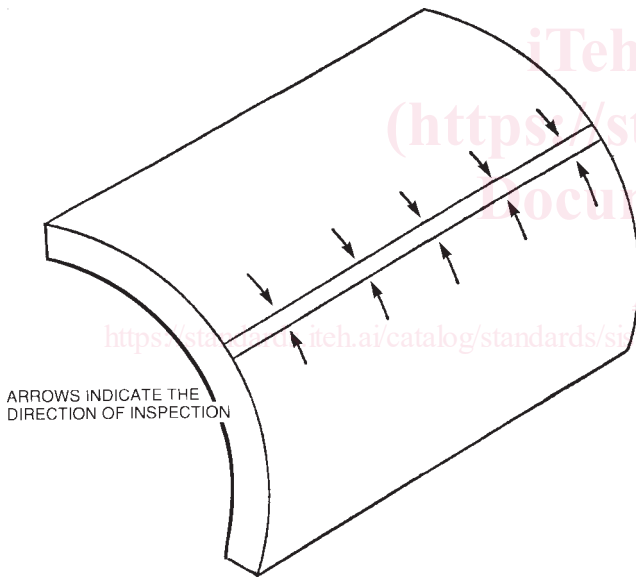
Supplementary Technique 13, for Inspecting Circumferential Welds, for Welds Ground Flush
